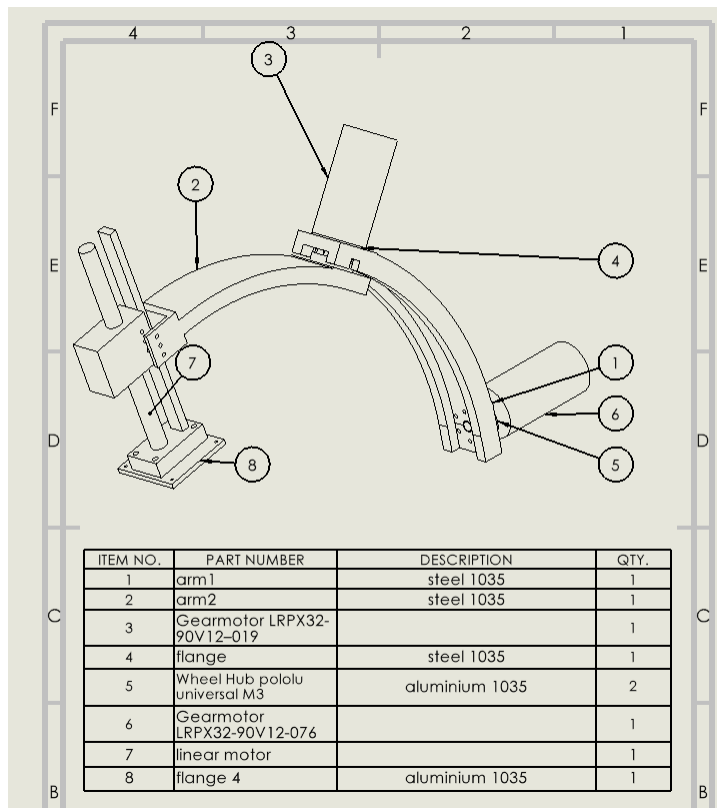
Drawing of the final design of the RCM mechanism with bill of material
